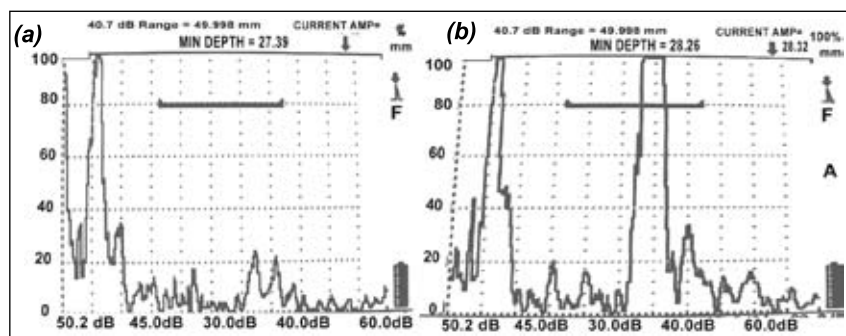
Typical A-scan signals corresponding to (a) a defect free weld and (b) a weld defect.
